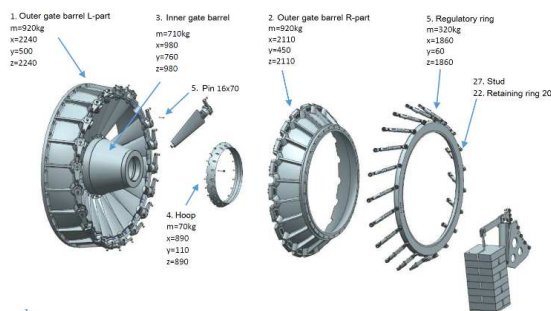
Part sheet used for assembly of the outer and inner gate barrel
